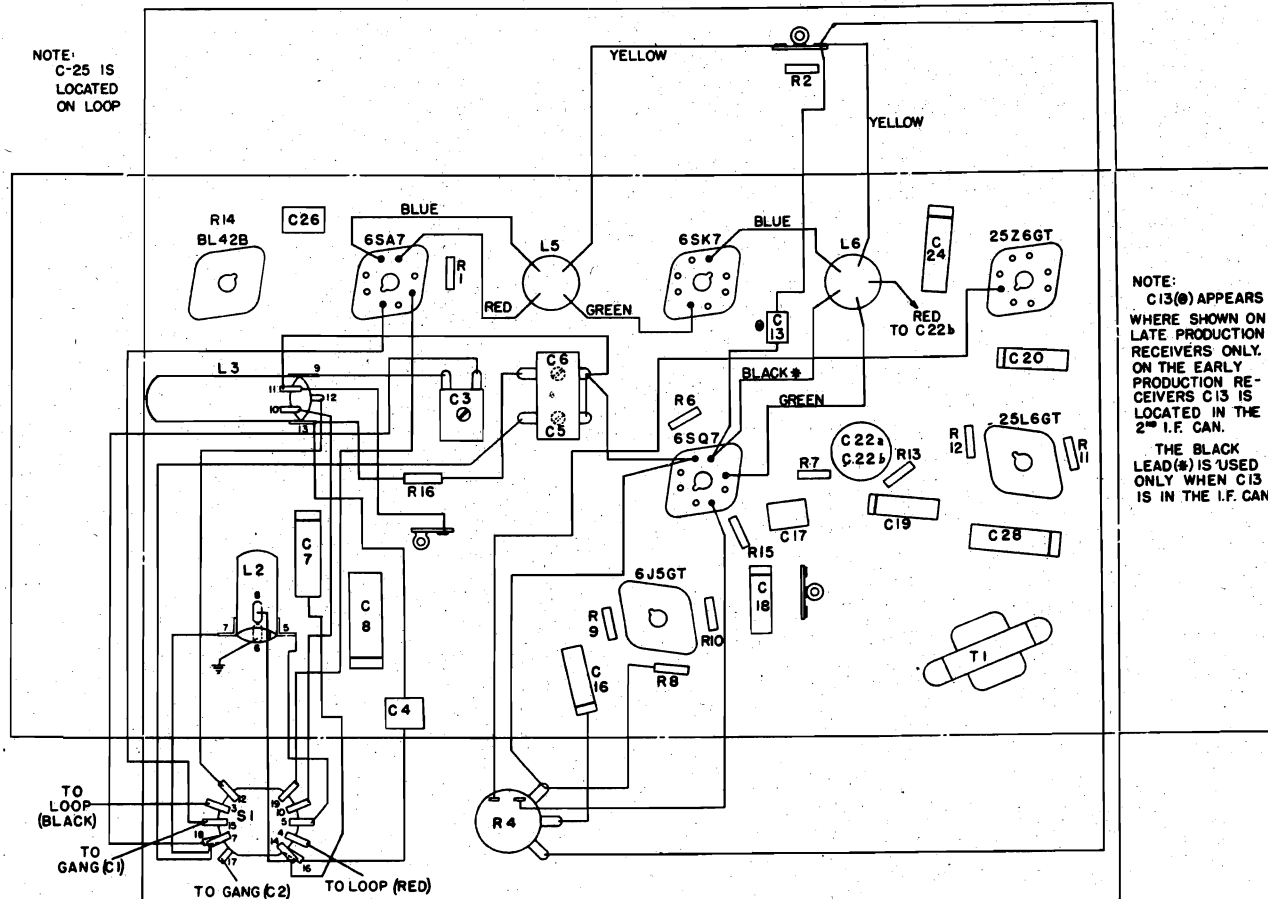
Chassis Parts Layout for Models H-620U, 630U and 632U
